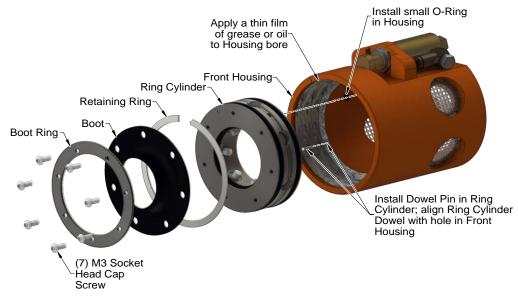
Install Ring Cylinder O-Rings and Dowel
